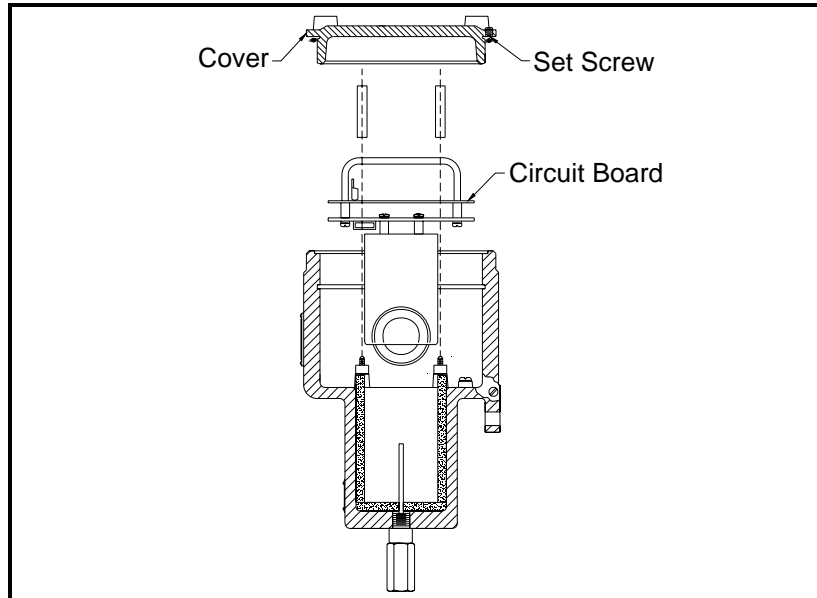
XMO2 Cover, Set Screw, and PCB
